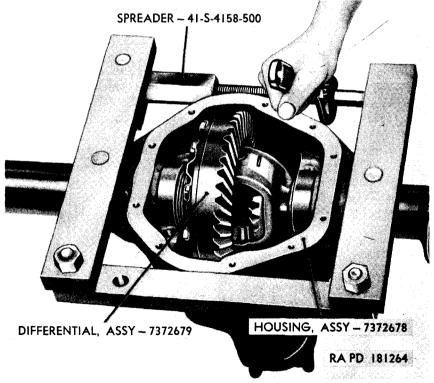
Spreading rear axle housing using spreader 41-S-4158-500.
